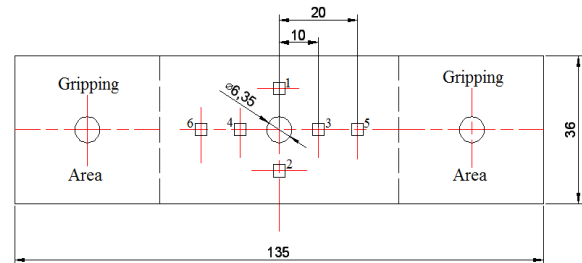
Open hole specimen geometry (all dimensions in mm) and strain gages locations.
